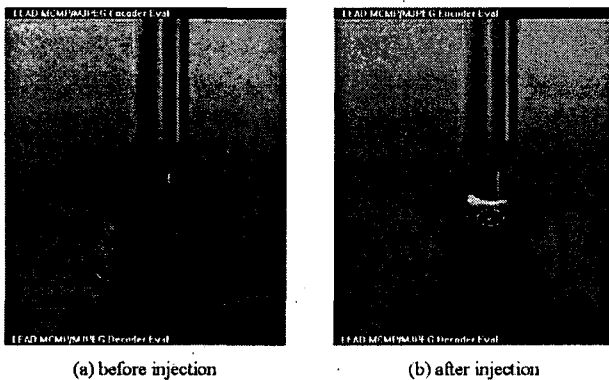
Thermosonic image of a defective welded surface of aluminum receptacle
